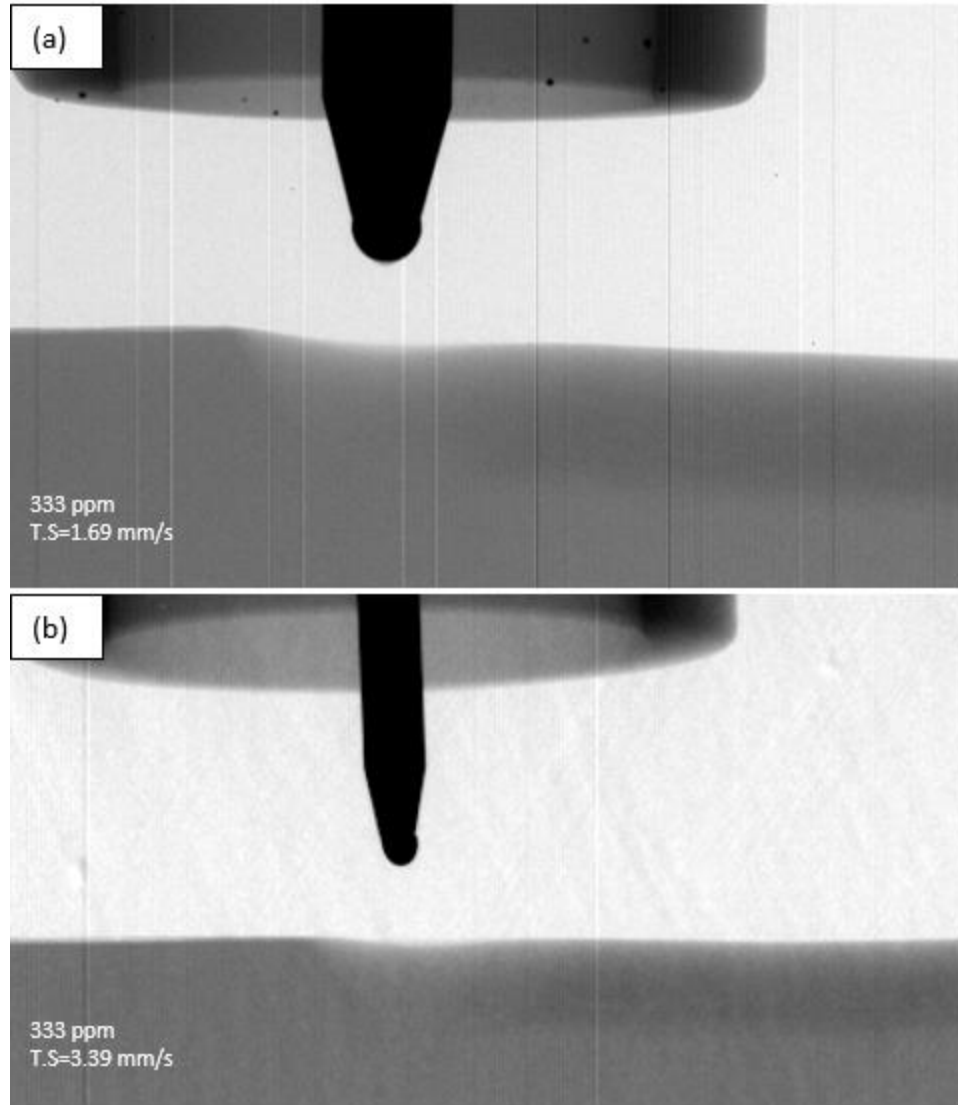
Alloy 1100 welded using 333 ppm of shielding gas hydrogen at a) 1.69 mm/s and b) 3.39 mm/s.
